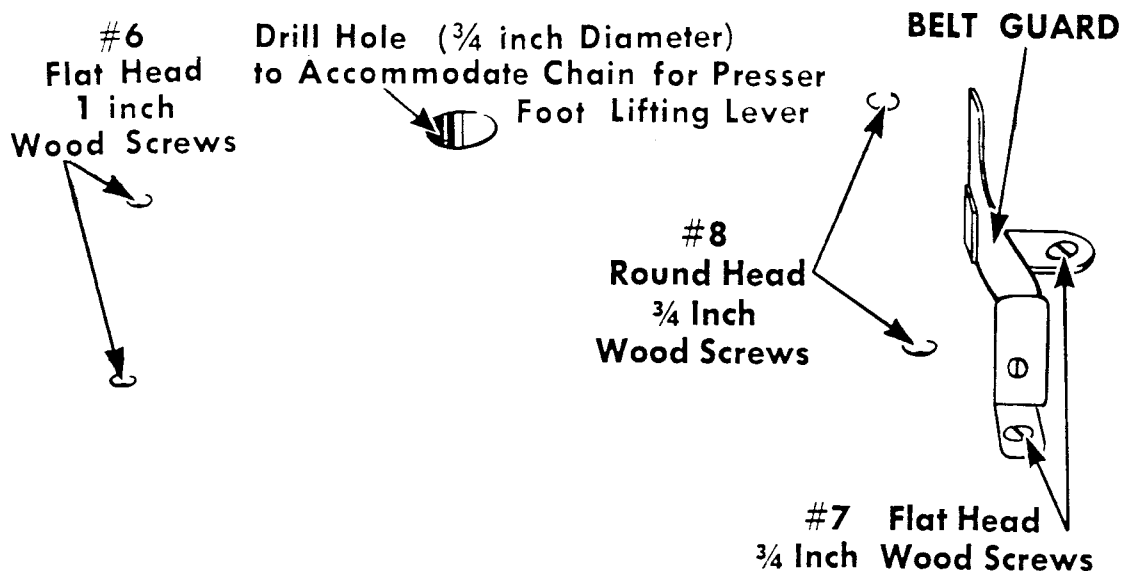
Machine Base on Table, Showing Position and Drill Sizes of Holes Required for Installation
